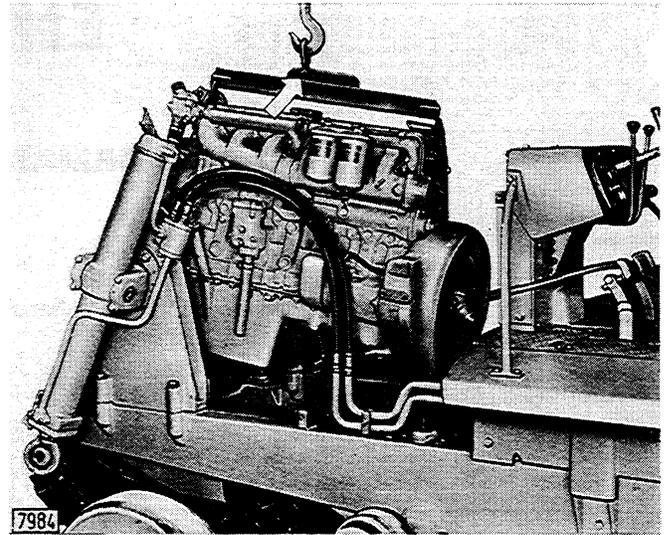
Removing the Engine Assembly Using Lift Hook 291493
